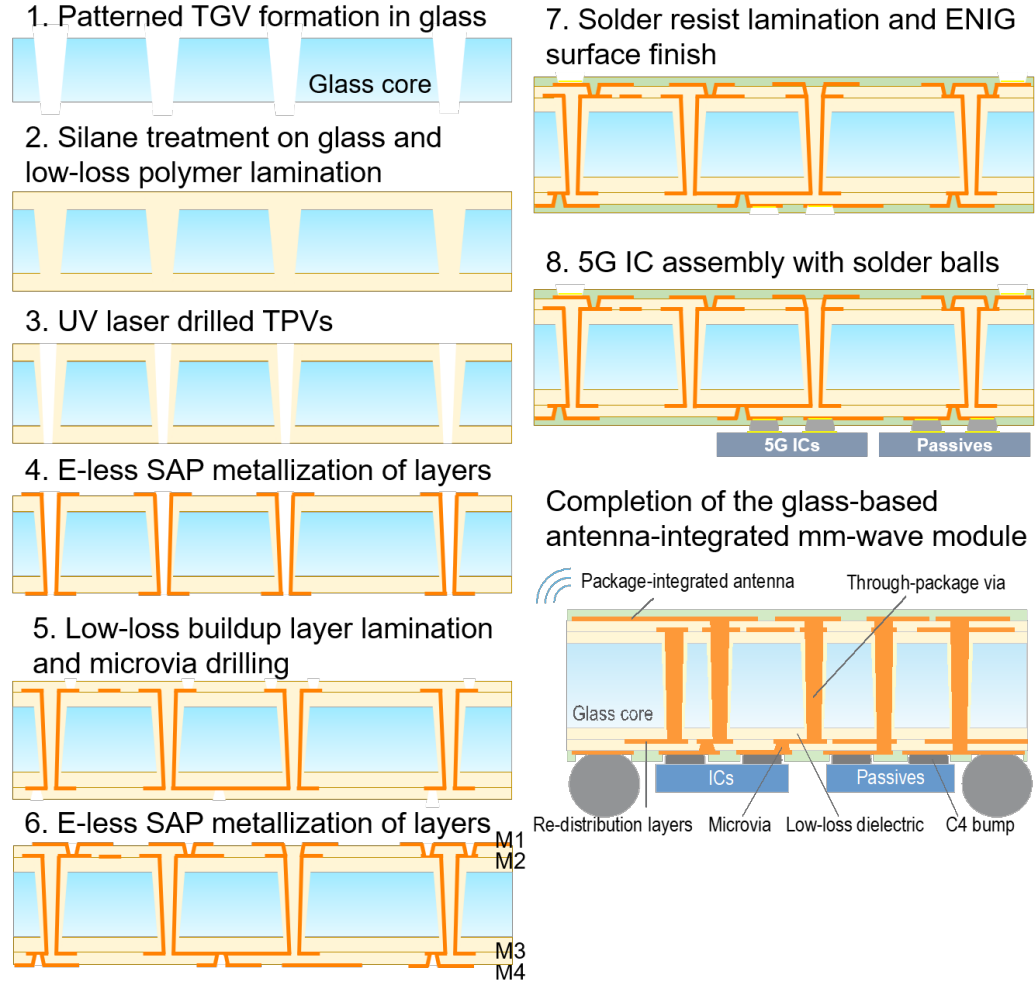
Fabrication process of highly-integrated mm-wave packages with the via-in-via process, RDL formation, and the assembly of ICs and passive components.
